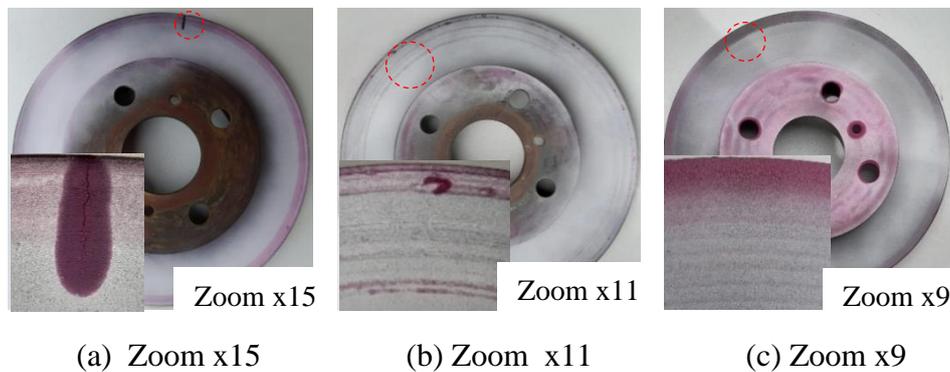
a) Open tangential discontinuities and porosity, b) Grooves and open discontinuities, c) Rust and machining discontinuities.
